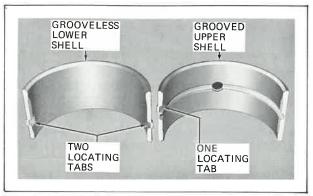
UPPER AND LOWER MAIN BEARING SHELLS.
